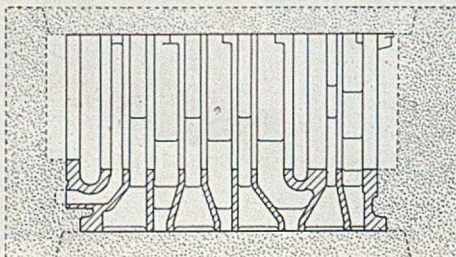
Equipment for producing the Compressor Half-casing by the Core-assembly Method.
